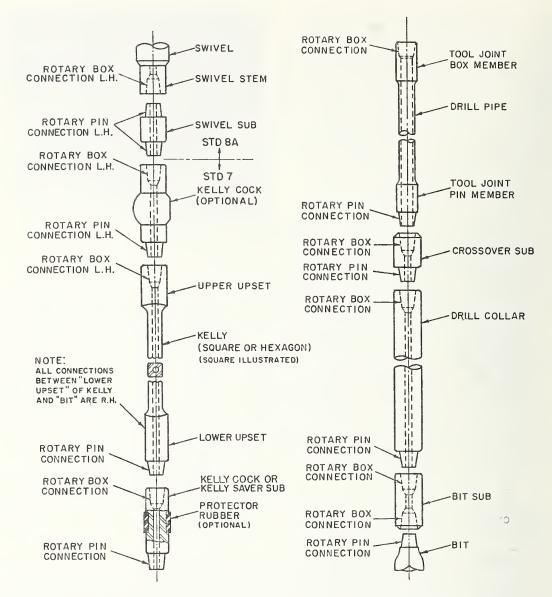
Typical drill-stem assembly for oil industry (from API Spec 7).
